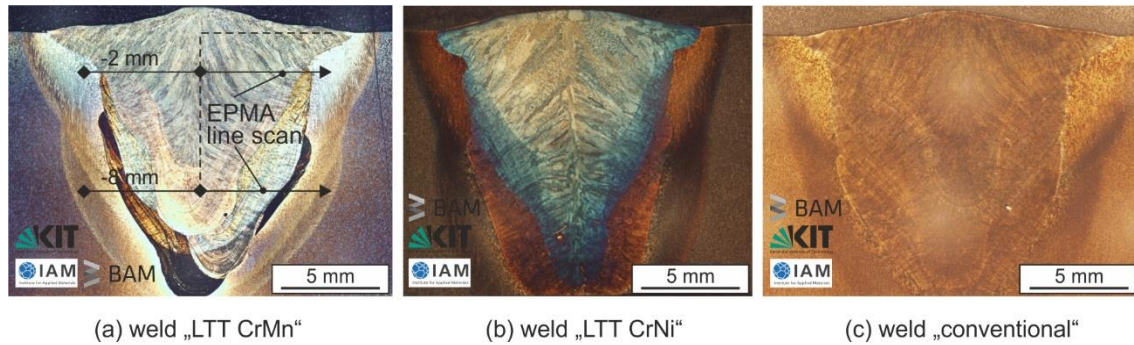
Cross section of the joints after welding of the final pass for all three weld consumables investigated here; etched with Lichtenegger and Bloech etchant
